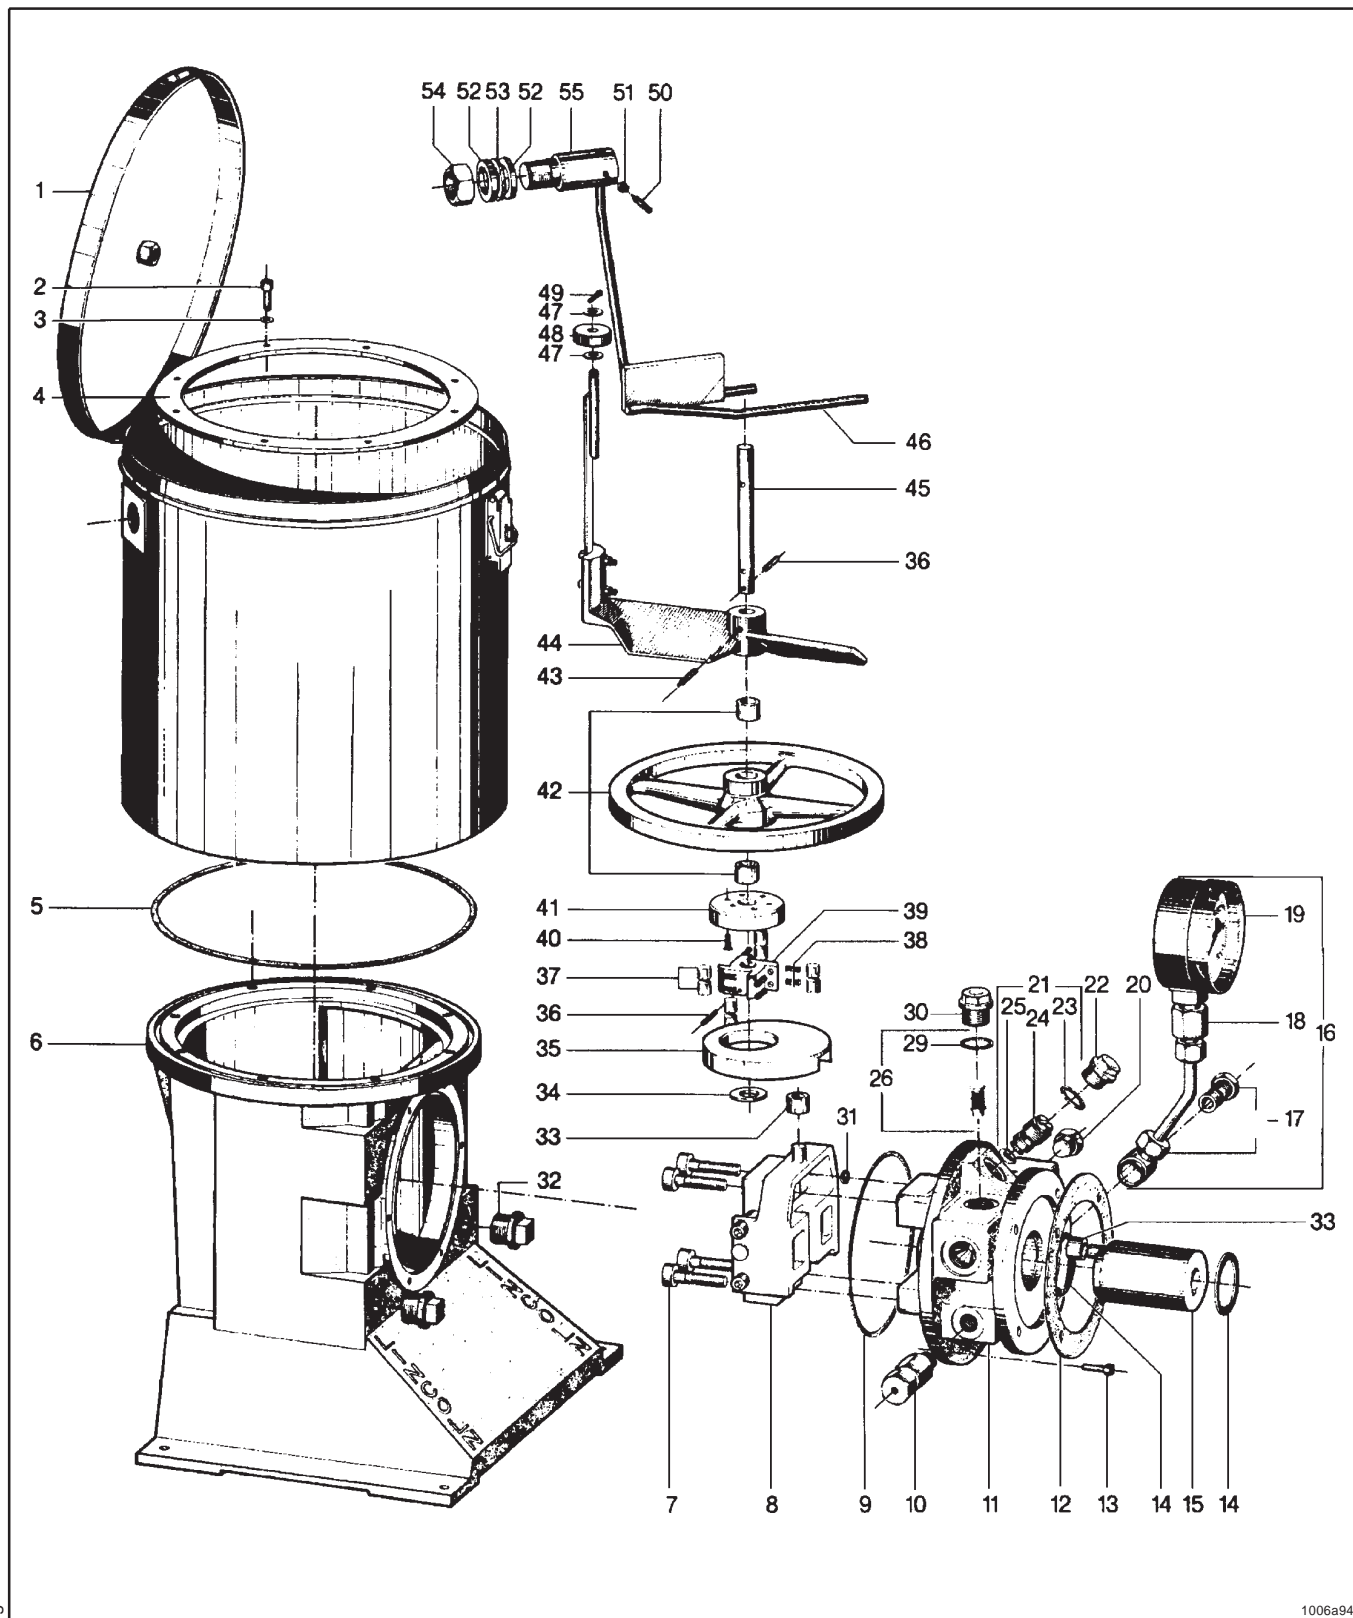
Central lubrication pump ZPU 08/14/24 without drive assemblies
